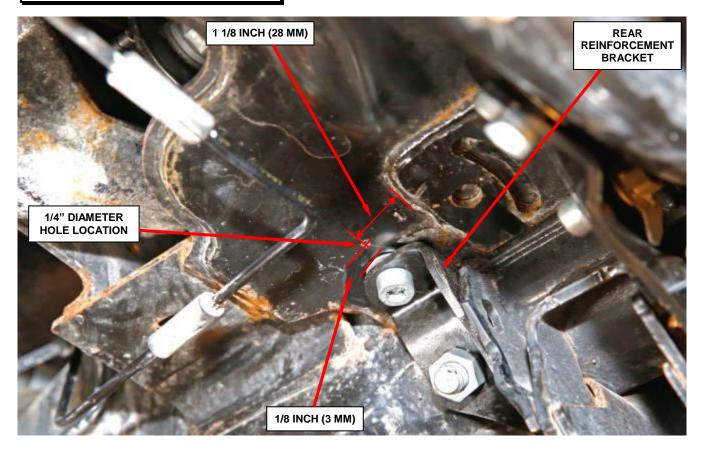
1/4 Inch Diameter Hole Location for Brake Tube Clip
